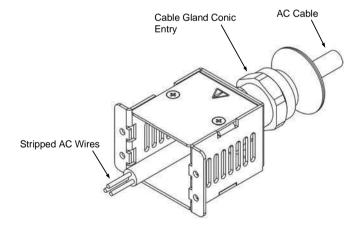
Insertion of the AC Cable through the Cable Gland and Strain Relief Bracket Assembly
